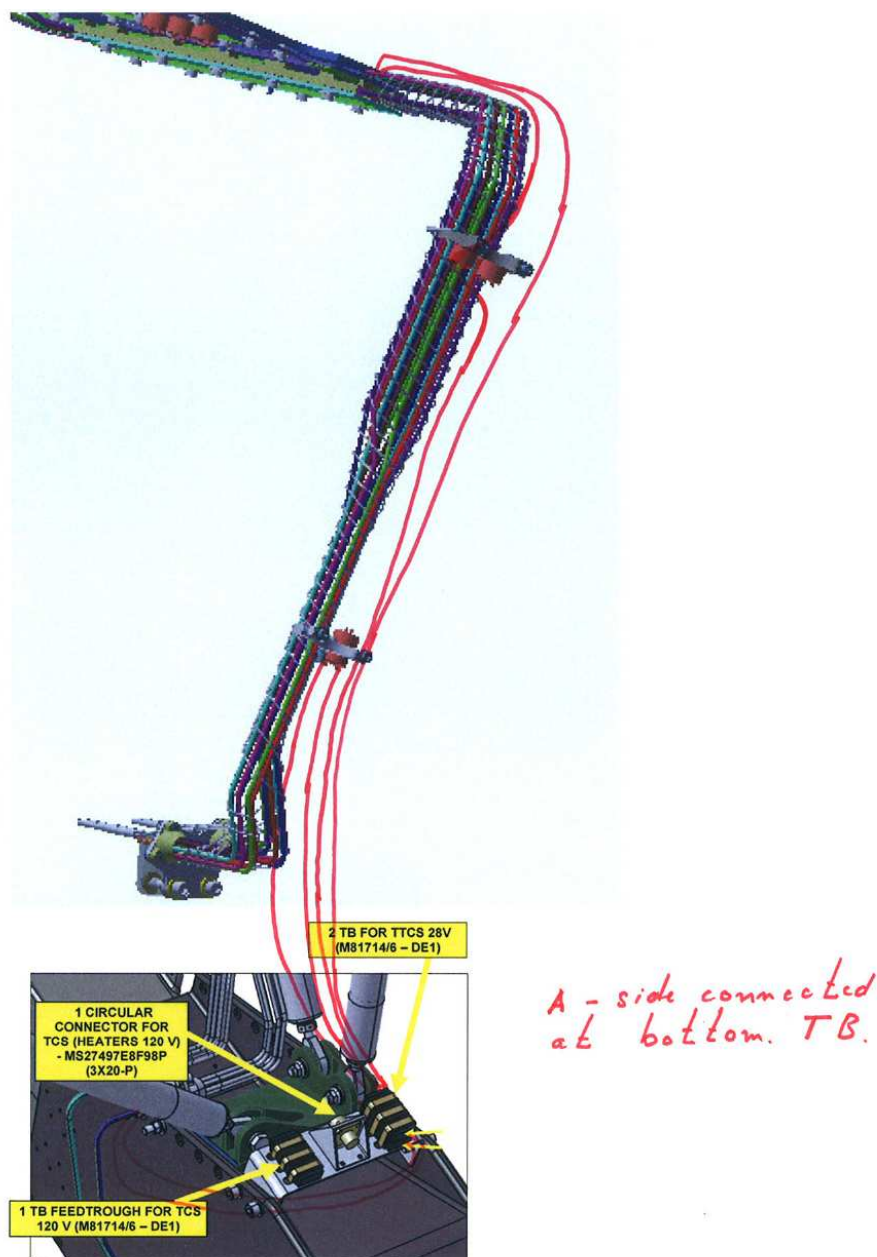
Wiring lay-out liquid line wire heaters A-side
